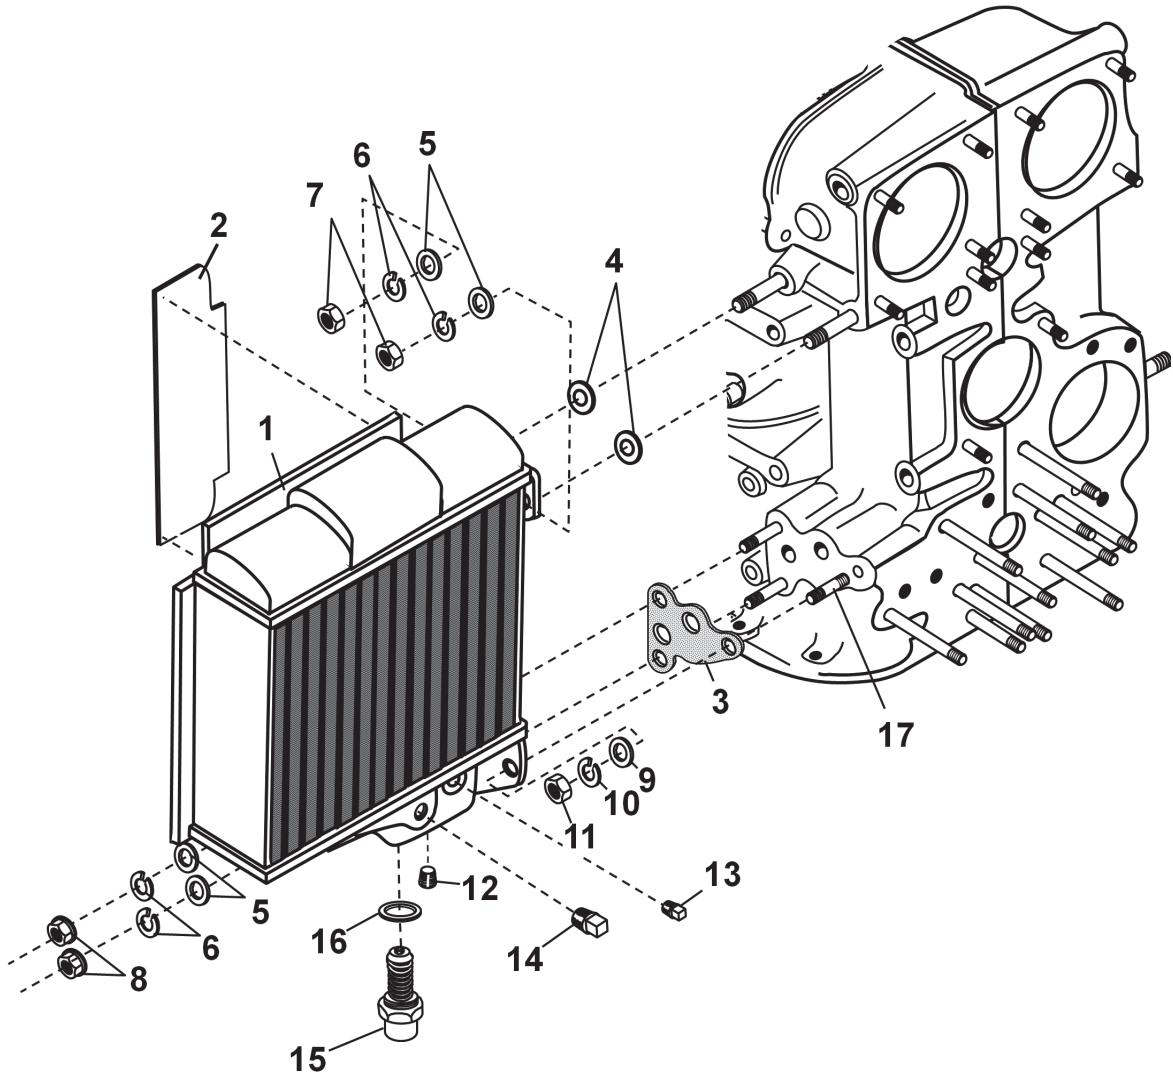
IO-550-A & B Oil Cooler A B
